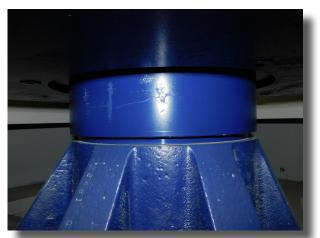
Example of how the rotor boss skirt should fit on top of the seal plate / bearing cartridge.
